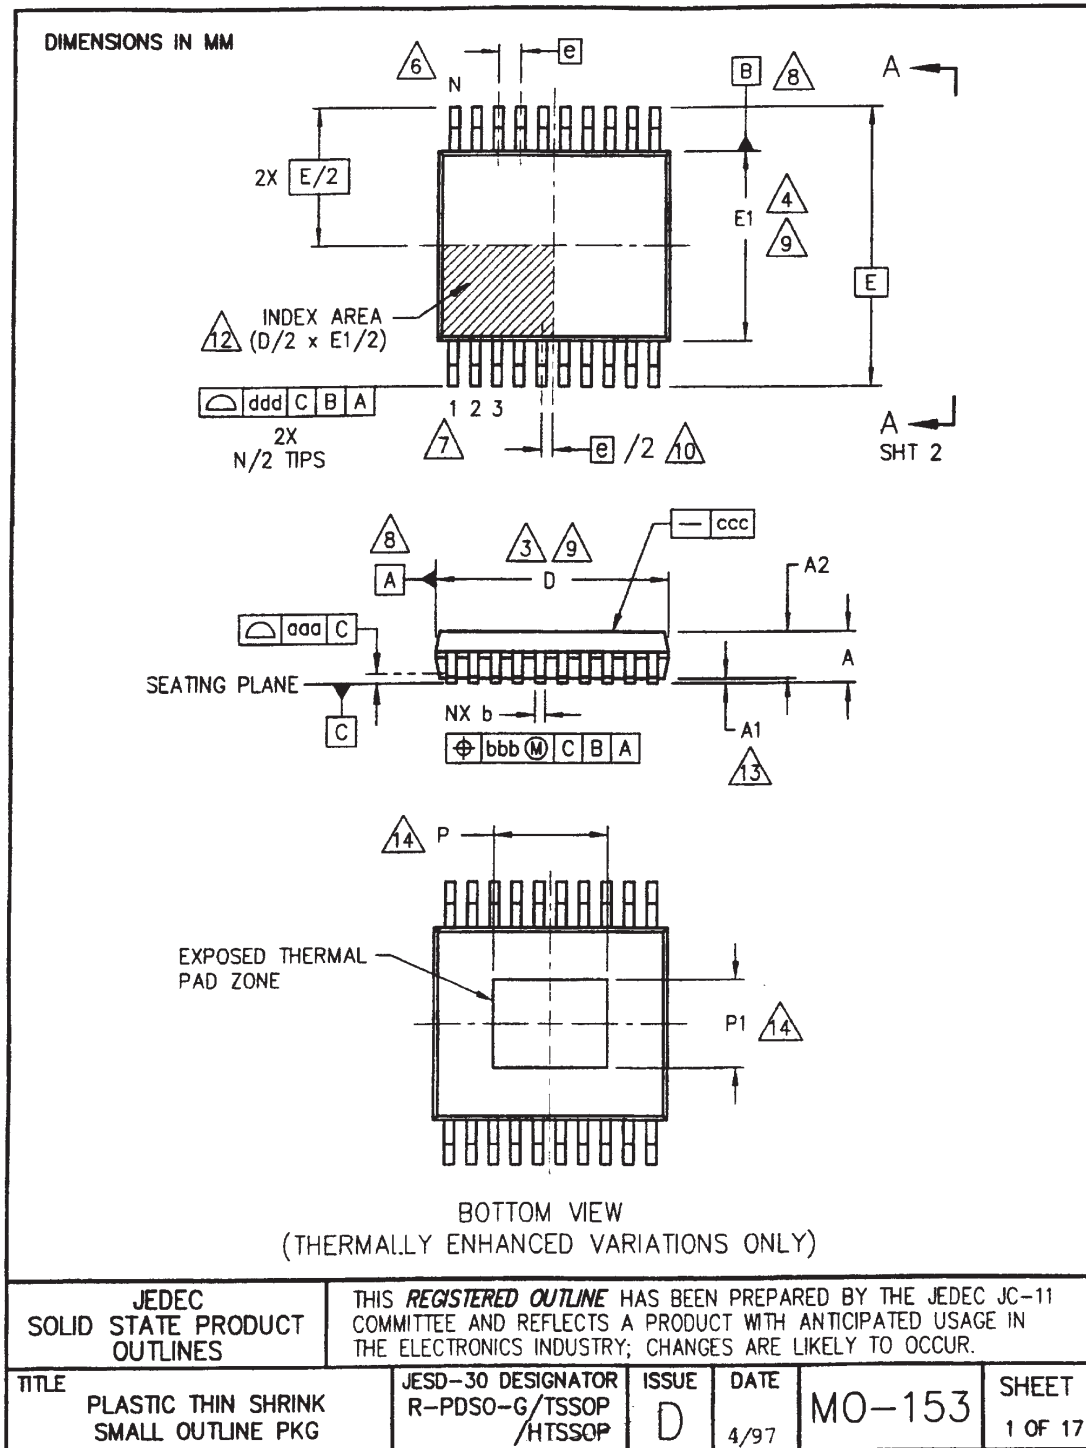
Example of a Registered-Outline Drawing Top Sheet
